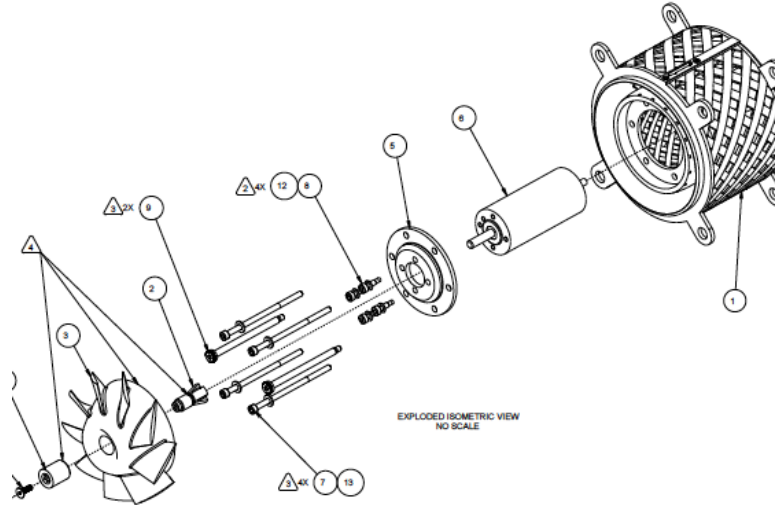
The metal spacecraft cabin ventilation fan tested in 2023 with redesigned rotor assembly.
